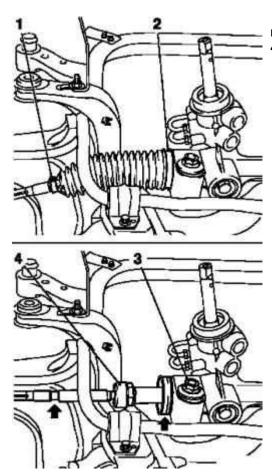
Removing the steering rods: 1, 2 - Fixing brackets, 3 - nut, 4 - tie rod ends
